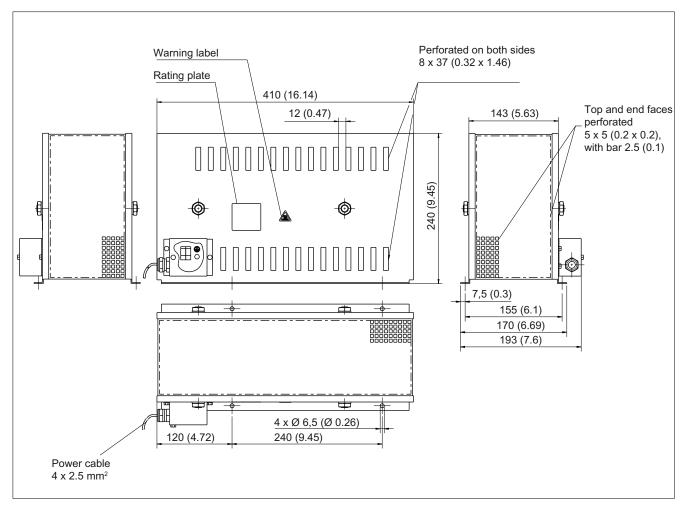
1500 W damping resistor for HFD line reactors, all dimensions in mm and (inches)
